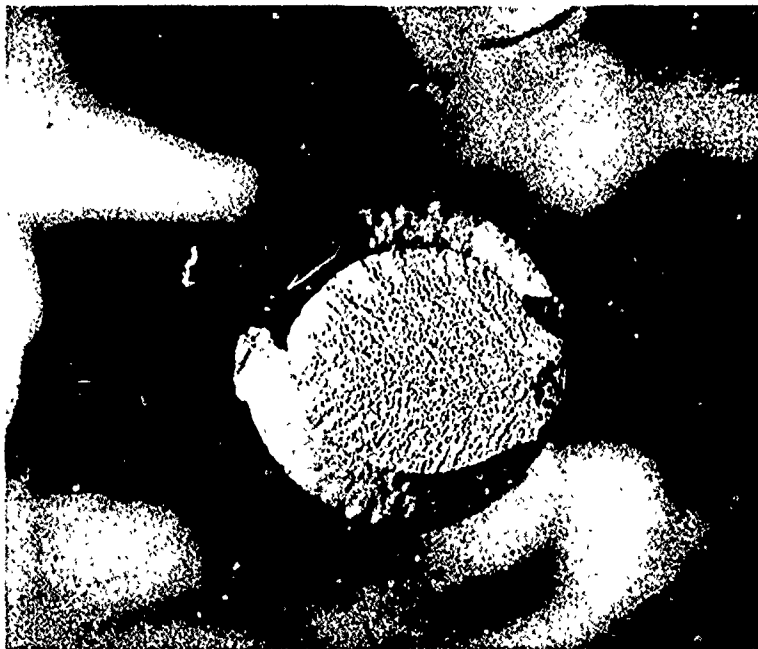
Fracture Surface of Vac-Cad Specimen No. 2.
